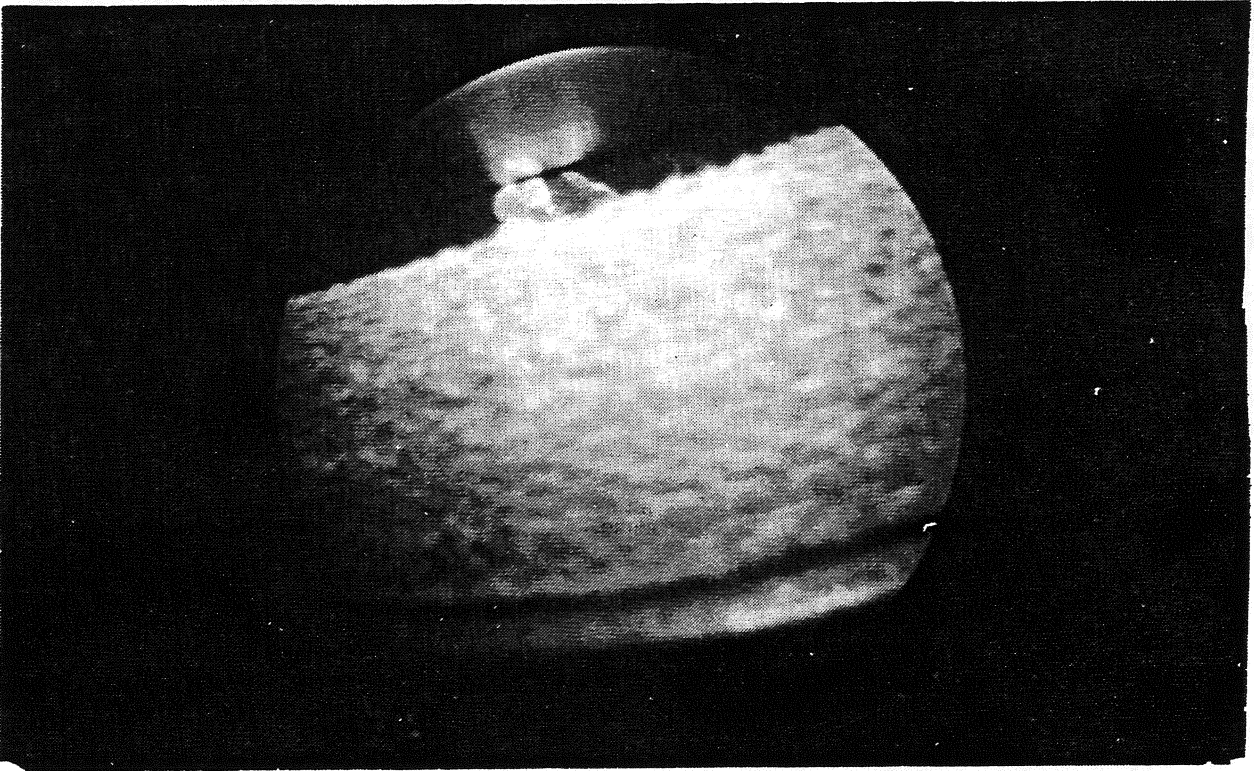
HPOTP Bearing Balls, Unacceptable Spalling (Typical)
